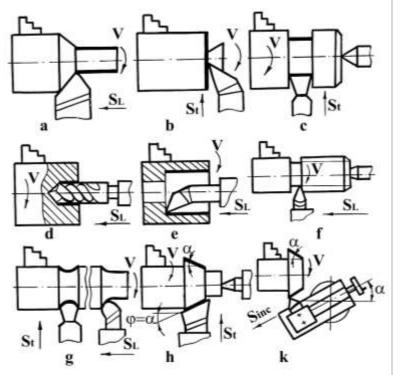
Cutting operation used in lathe work: a – turning; b – facing; c – necking or parting; d – drilling; e – boring; f – threading; g – forming; h, k – tapering
